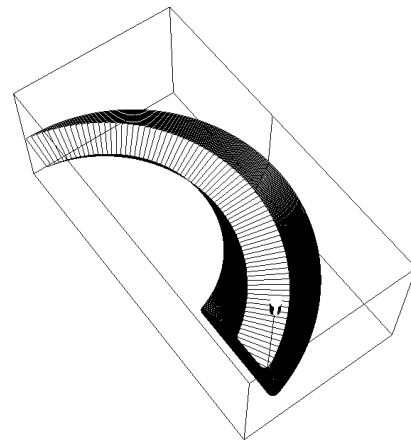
Section 2 of the muffler, tool path for Z from -35.5 mm to -74 mm
